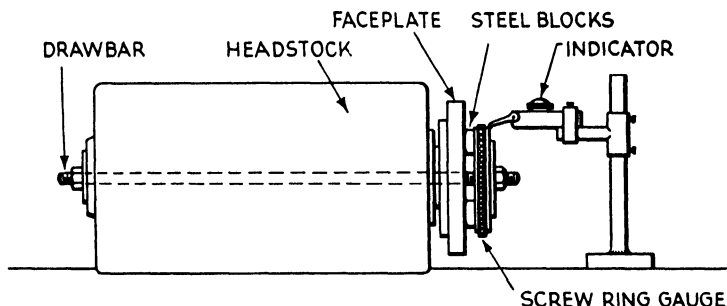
SET-UP FOR CENTRALIZING WORK FOR GRINDING AN INTERNAL THREAD
